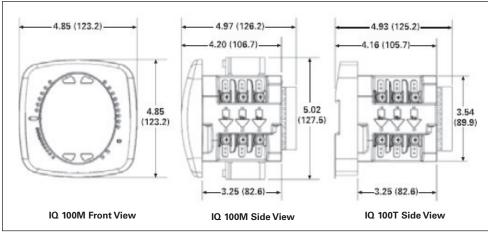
IQ 100 Meter Dimensions — Front and Side Views
